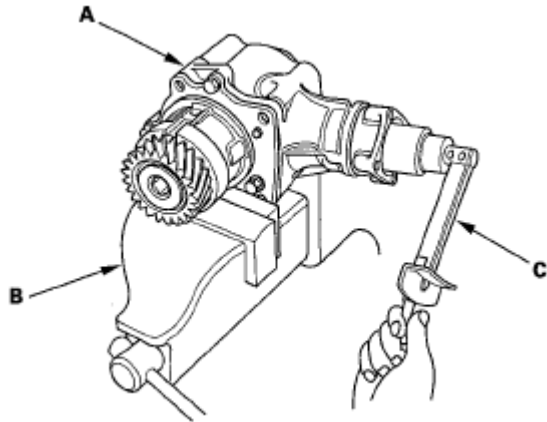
Rotating Companion Flange To Tapered Roller Bearings
